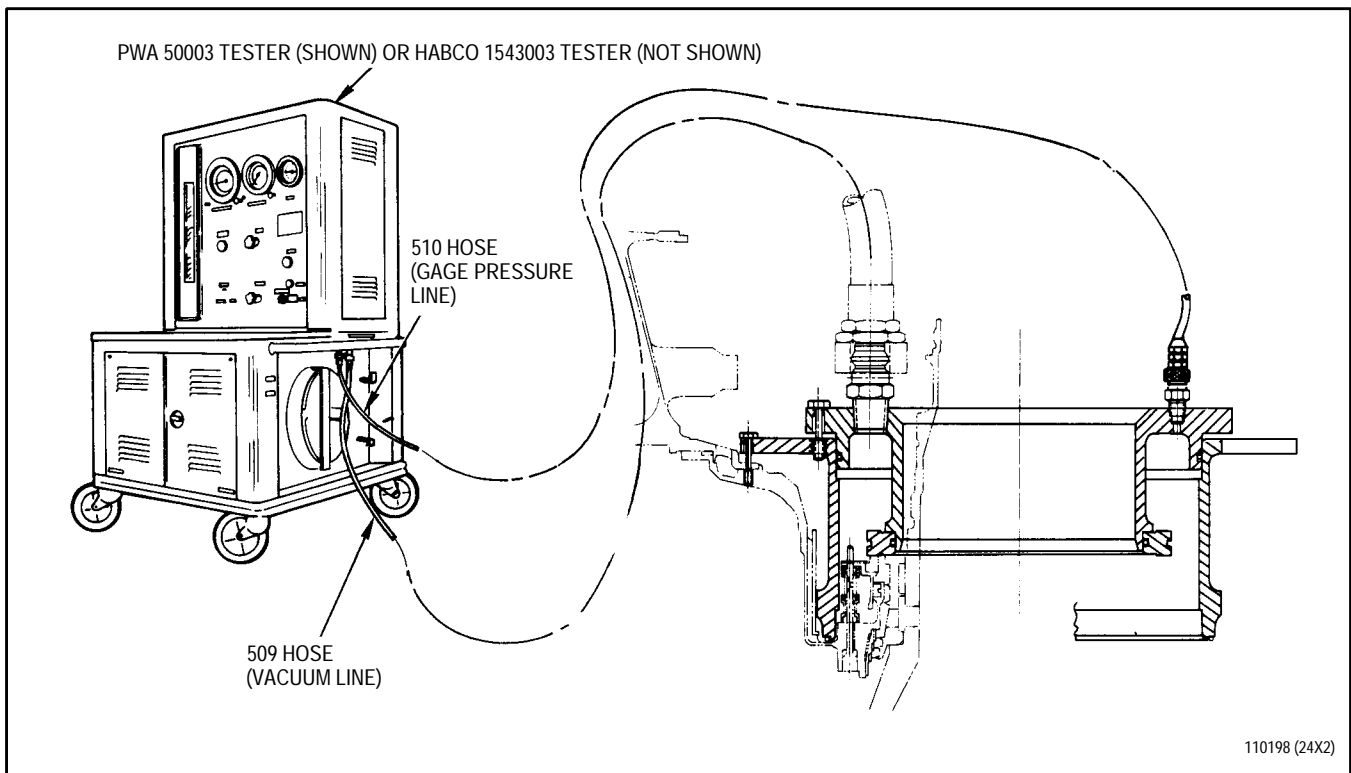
A. No. 3 Bearing Rear Seal Assembly - Air Leakage Check (Sheet 2 of 2)
